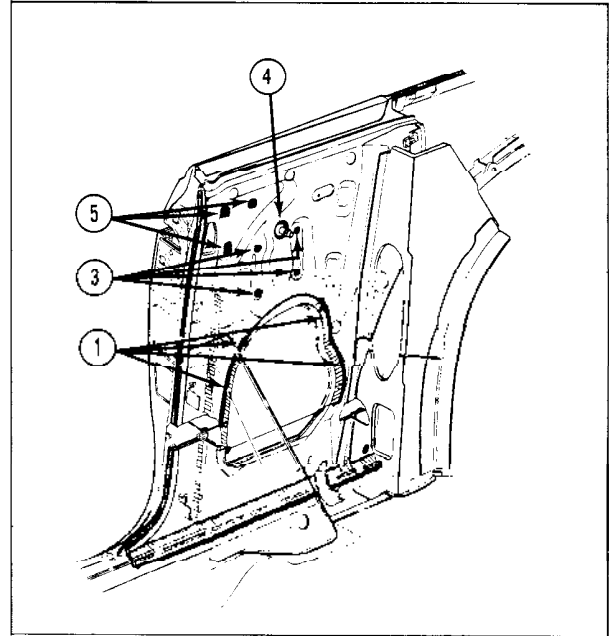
Rear Quarter Inner Panel Sealing "67" Style
